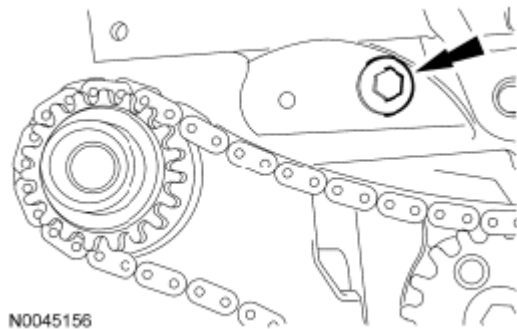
Locating Oil Pump Chain Drive Tensioner Shoulder Bolt
